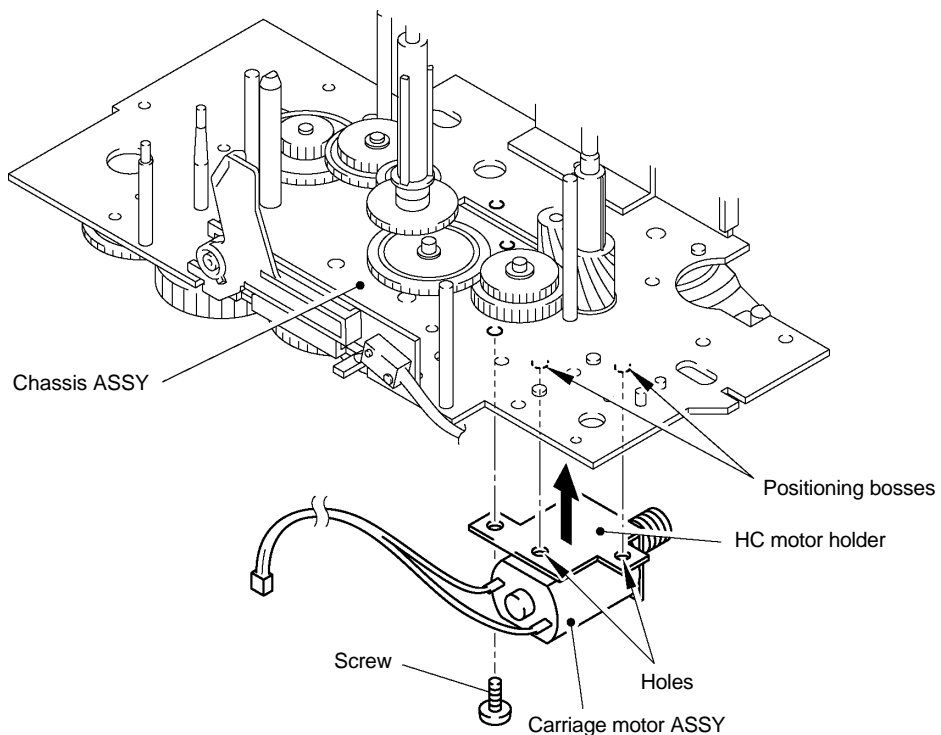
Reassembling the Carriage Motor ASSY (2)
